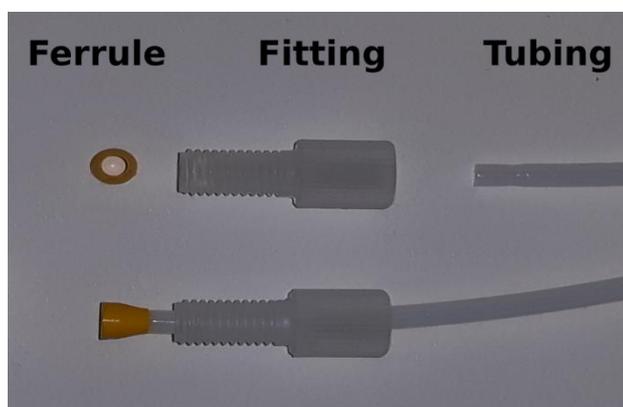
Assembly of the ferrule and fitting to the end of the PTFE tubing.
